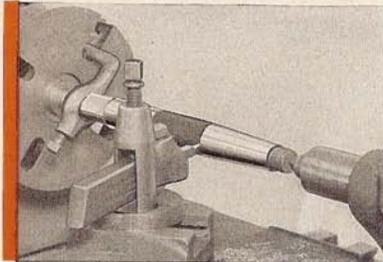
Turning a Taper on a Shaft in the 9-inch "Workshop" Lathe.
